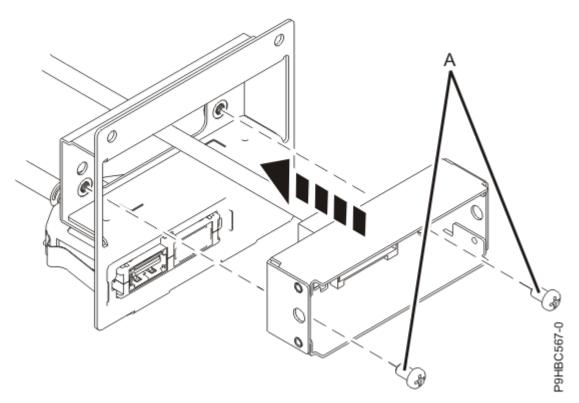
Installing the control panel display cable into the housing for a rack-mounted system
